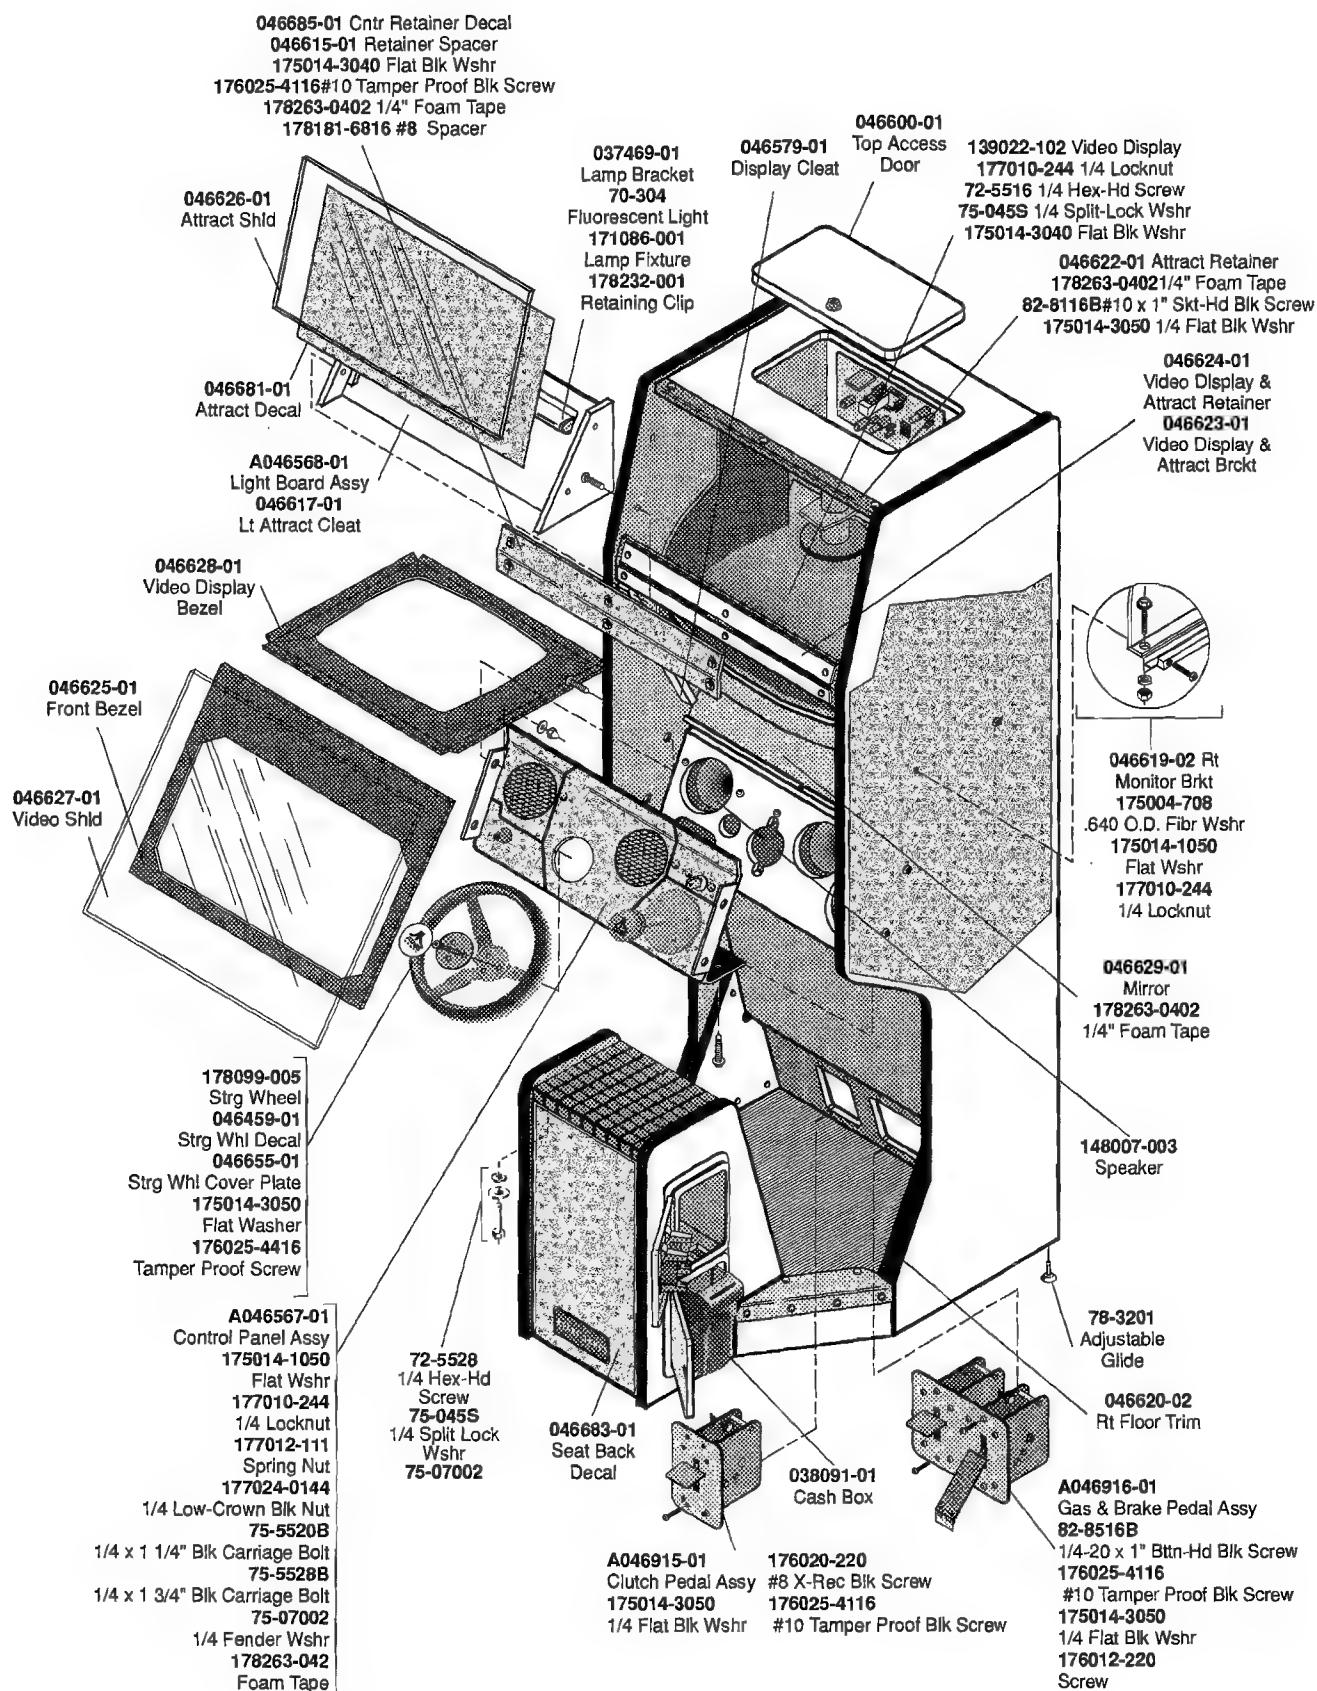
Cabinet-Mounted Assemblies, Front View
